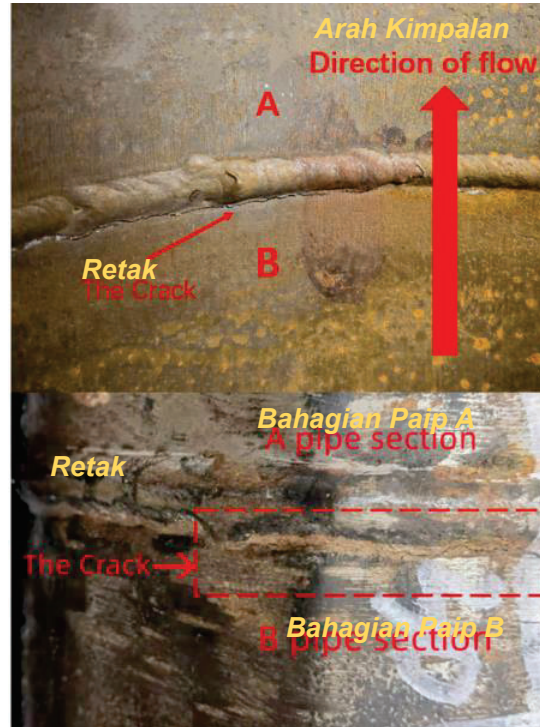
Macroscopic appearance of pipeline weld position
